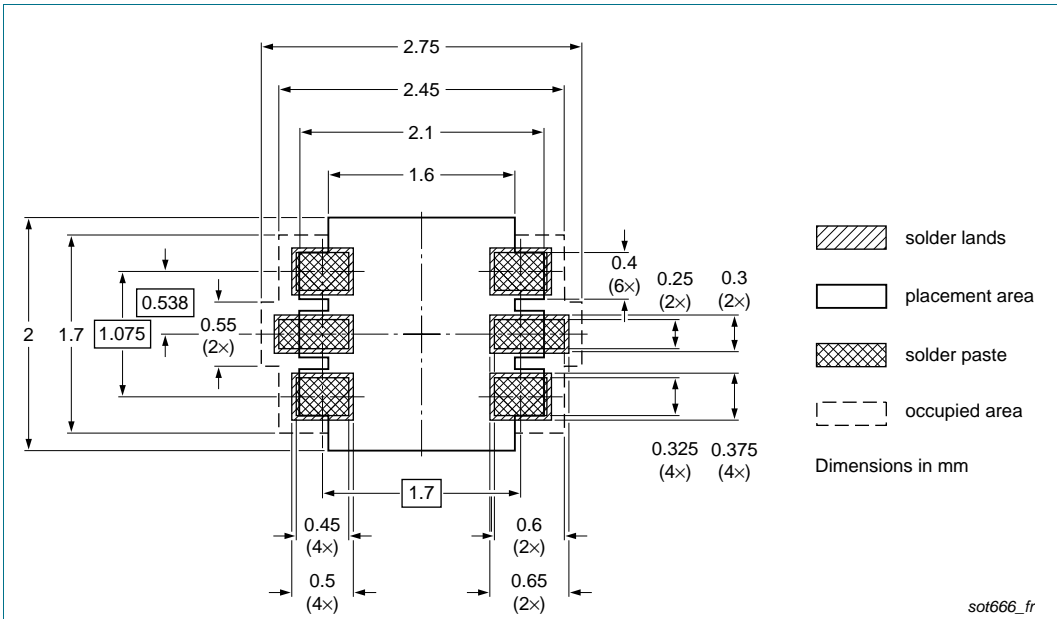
Reflow soldering footprint BAS16VV (SOT666)
